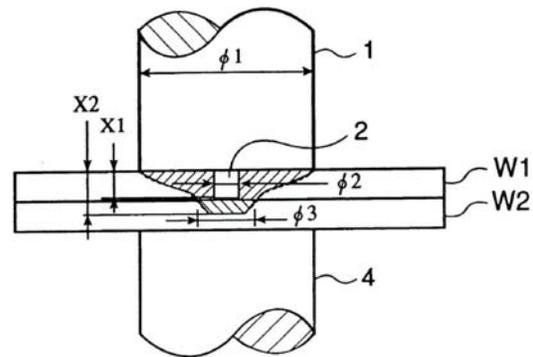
Spot friction welding pin tool and stirred zone in material to be joined. [1]
